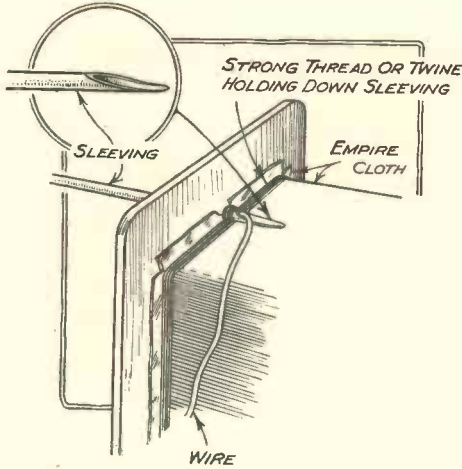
METHOD OF SECURING START AND FINISH OF WINDINGS.
